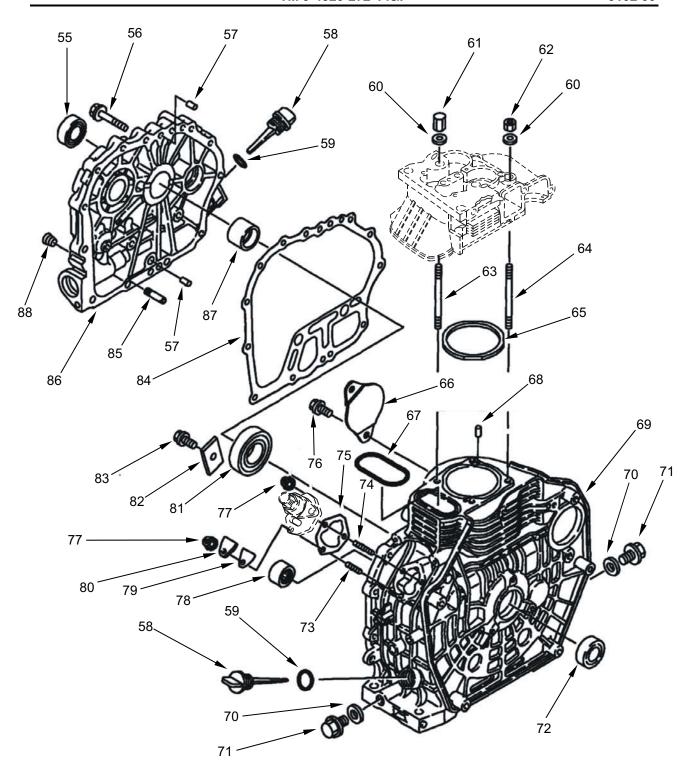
Engine, Diesel (Sheet 4 of 9) (Cylinder Block).
